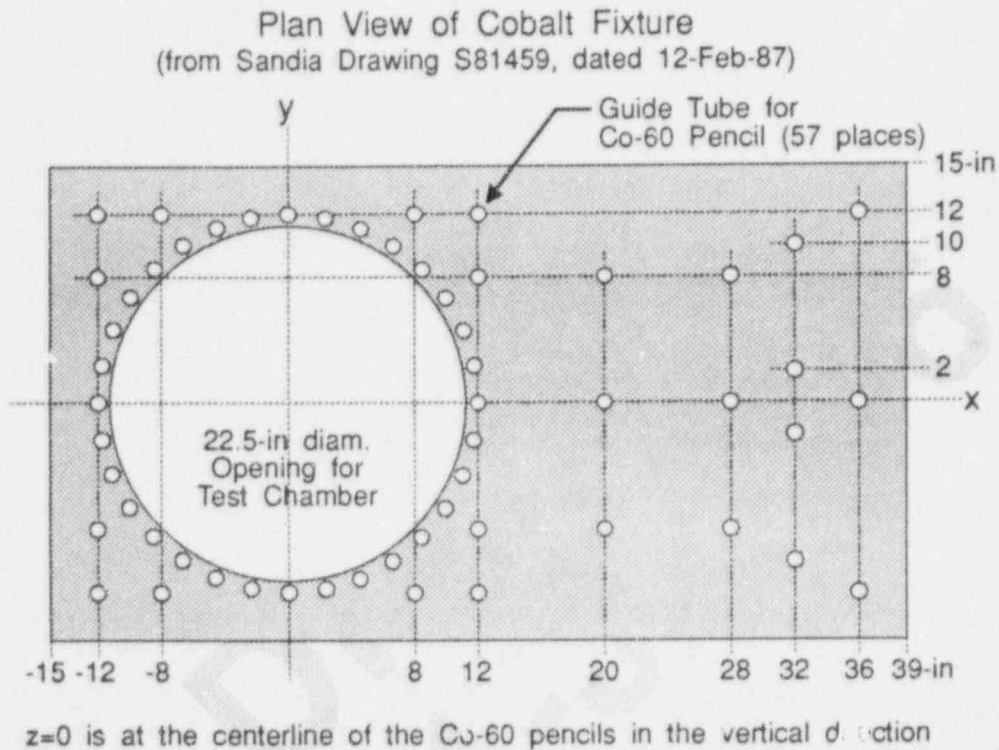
Plan view of large chamber cobalt fixture showing the fixture coordinate system and possible cobalt source locations.
